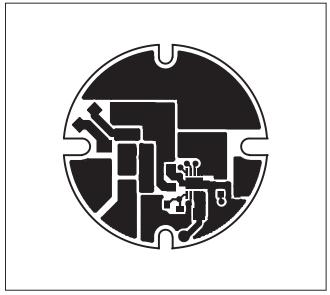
MAX16840 EV Kit PCB Layout—Component Side
